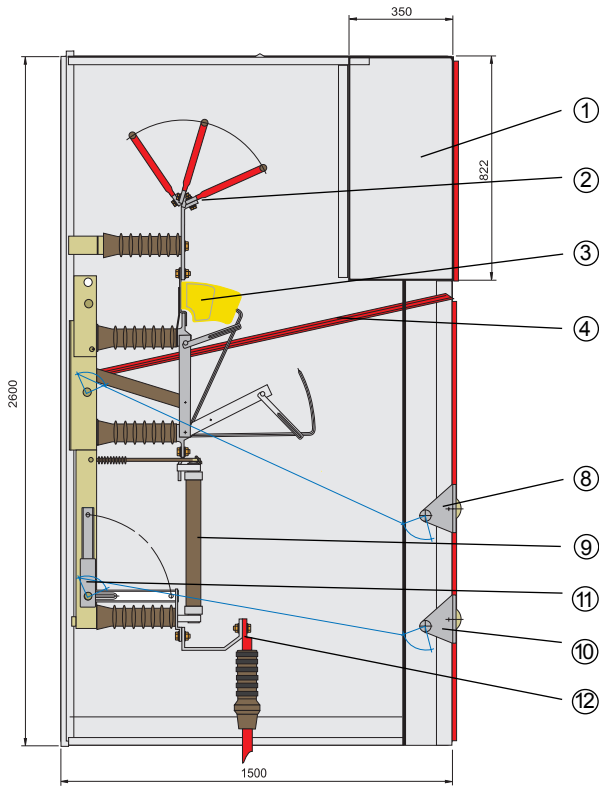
36 kV Transformer feeder panel with fuse-switch-disconnector H22 SEA
